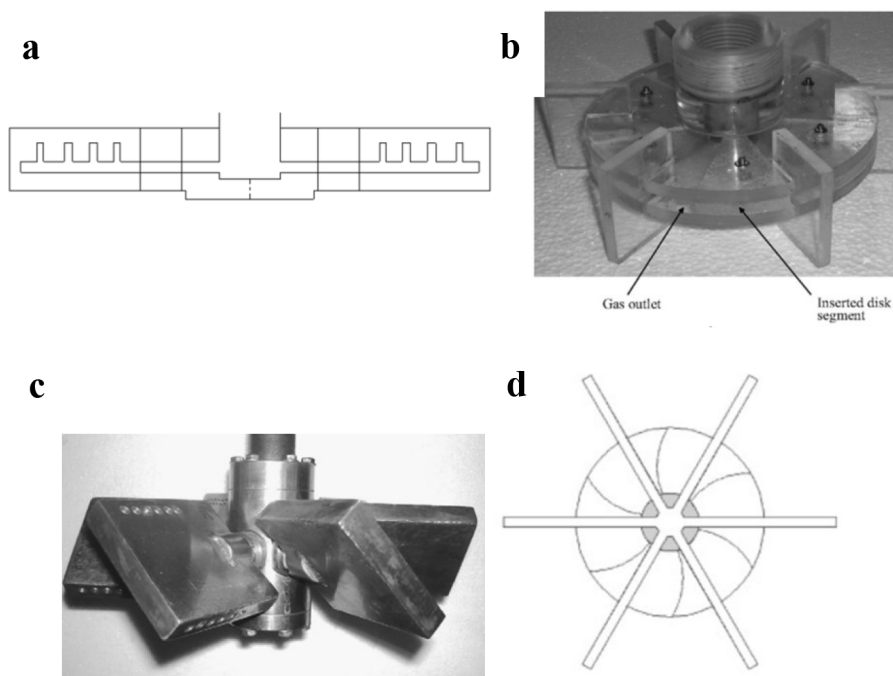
Improvement of self-inducing impeller design. (a) Six-blade concave self-inducing impeller. Reprinted with permission from ref 21. Copyright 1998 Elsevier B.V. License Number 5644001141792. (b) The self-inducing double disc impeller. Reprinted with permission from ref 22. Copyright 2008 Elsevier B.V. License Number 5643991096684. (c) Self-inducing inclined impeller. Reprinted with permission from ref 22. Copyright 2008 Elsevier B.V. License Number 5643991096684. (d) The hollow tube self-inducing impeller incorporating six circular tubes. Reprinted with permission from ref 23. Copyright 2009 Elsevier B.V. License Number 5643601243866.
